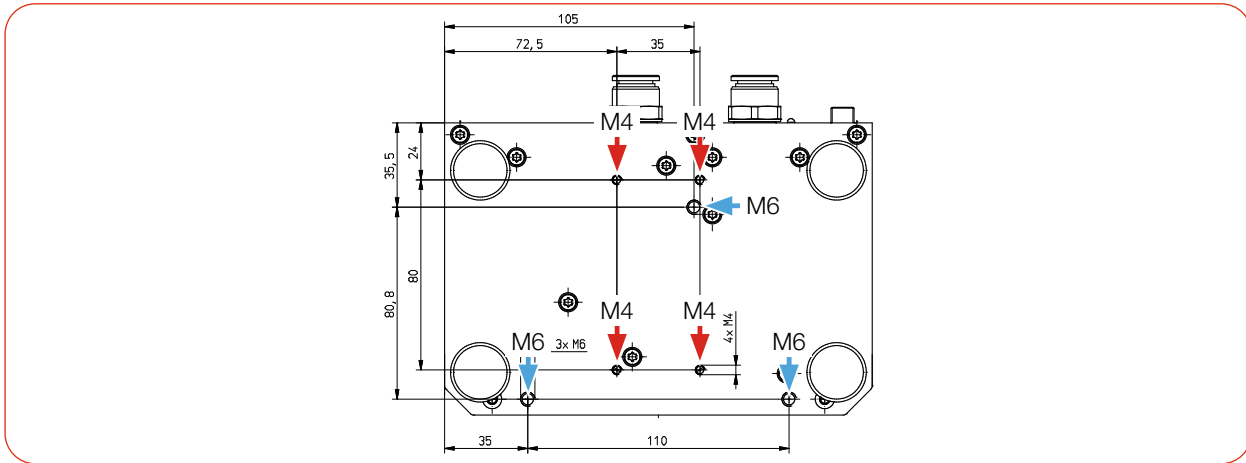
Mounting threads M4 and M6 in the bottom of the housing of the CPM F-1 (dimensions in mm)
